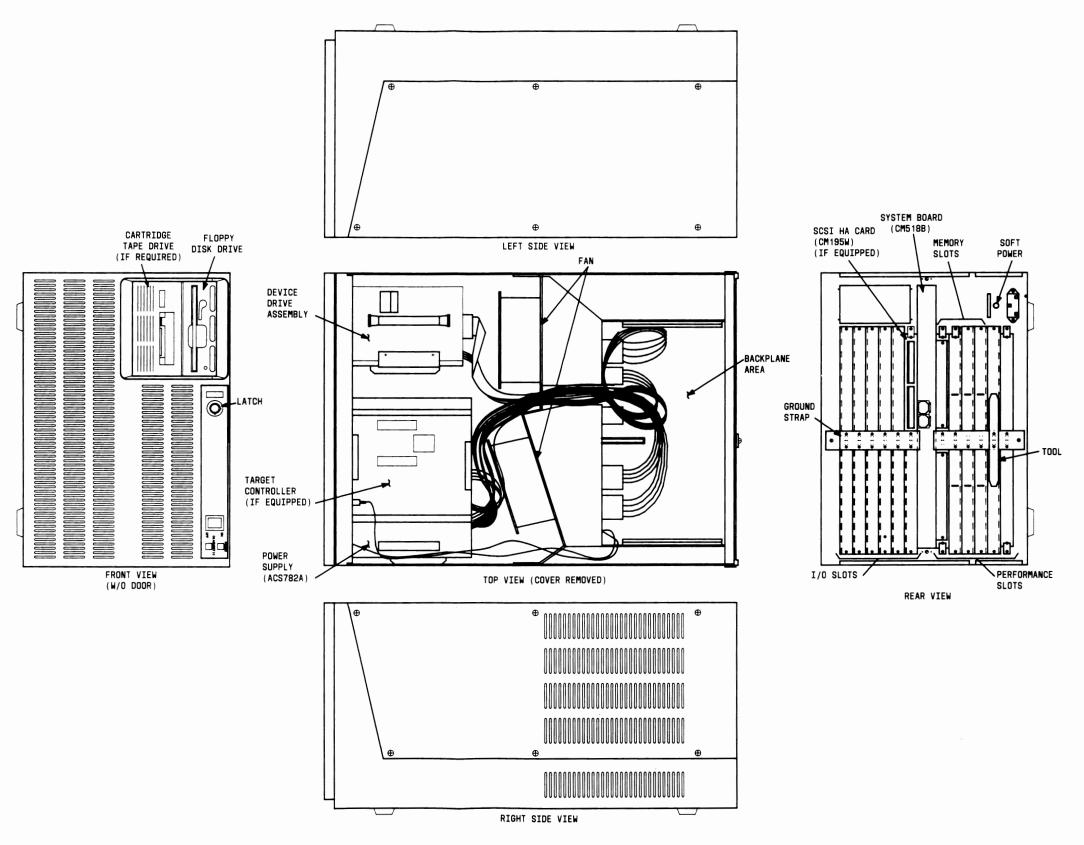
3B2/700 Computer Cabinet Assembly Drawing (ED-3T047-30)
